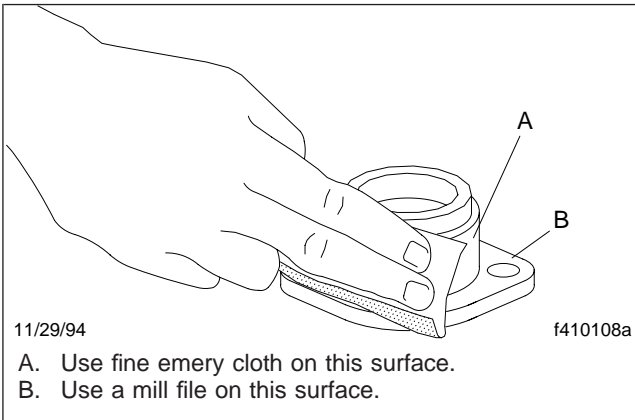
, Smoothing a Full-Round Yoke U-Joint Bearing Cup
